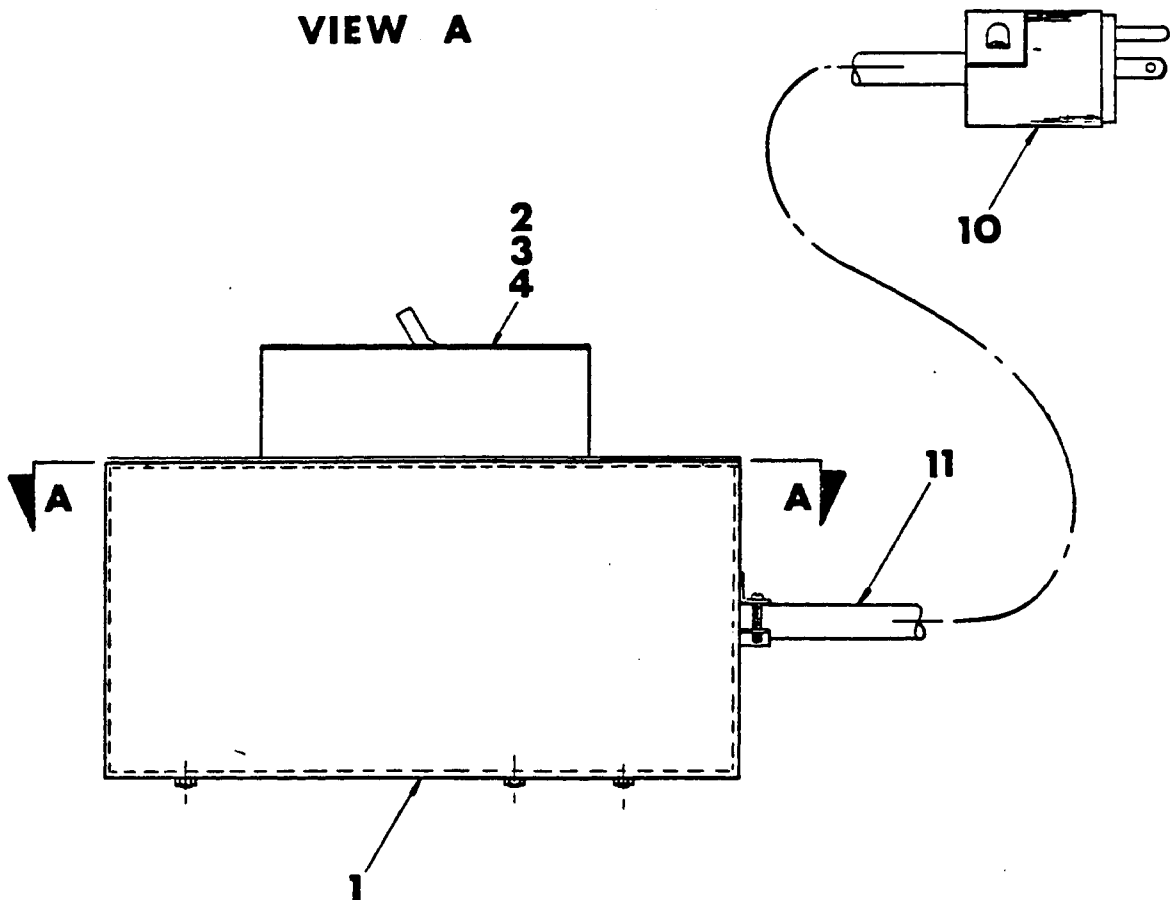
C.3 - BASE ASSEMBLY (P30AC)
